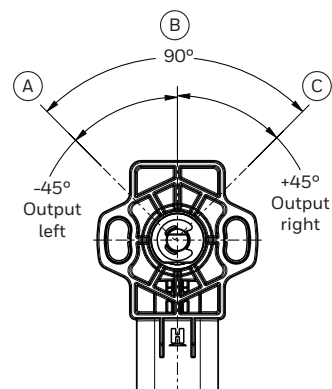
RTY Series Mounting Dimensions (For reference only: mm [in.])
